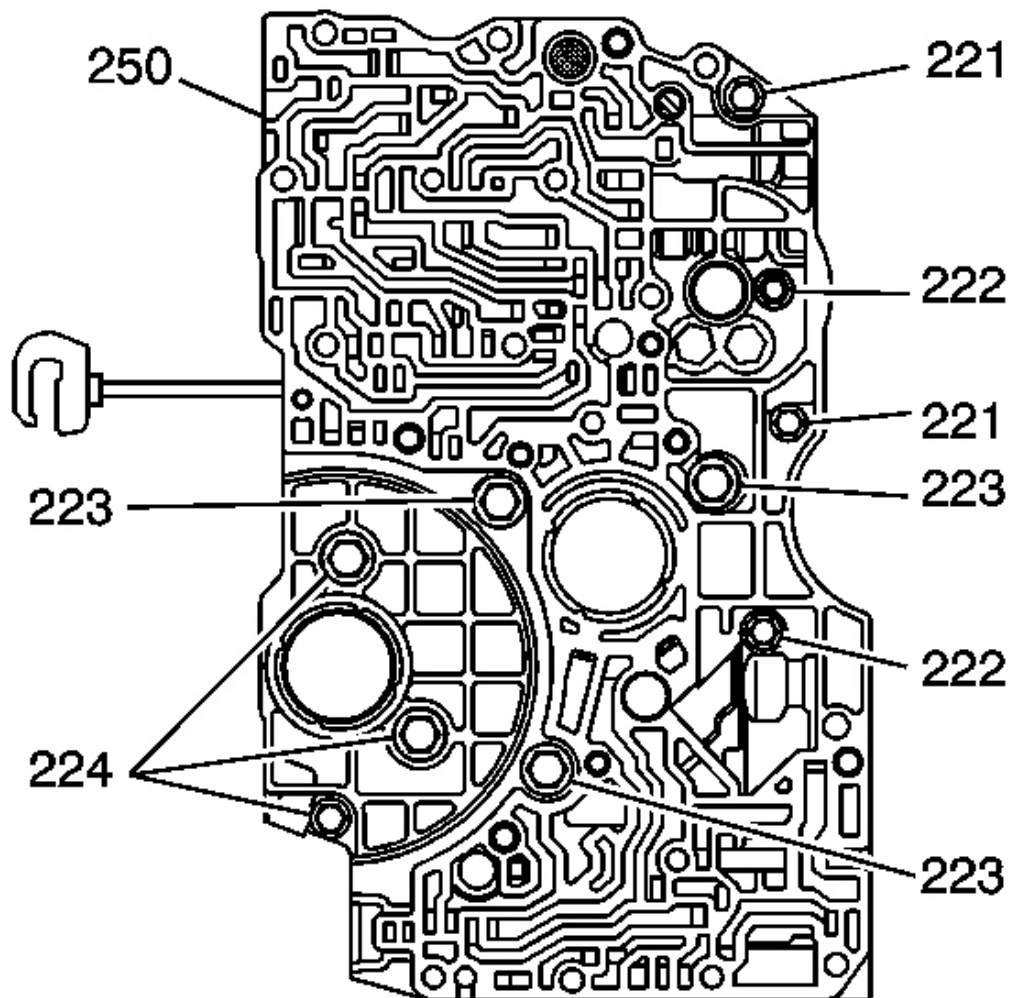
Main Control Valve Body Assembly & Bolt/Screws
